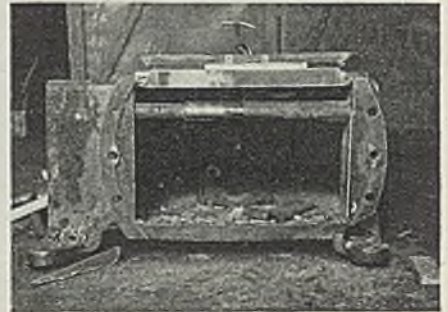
Adjustable brace used during welding to prevent motor cases from being drawn out of line
